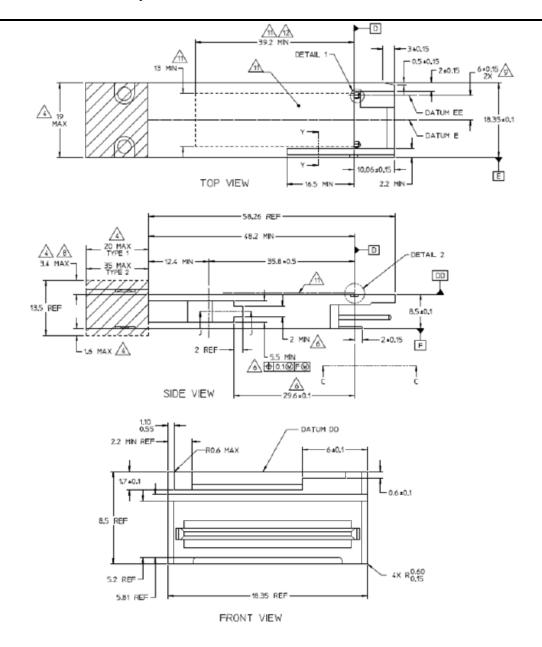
FTCD4313E2PxL Mechanical Dimensions.
